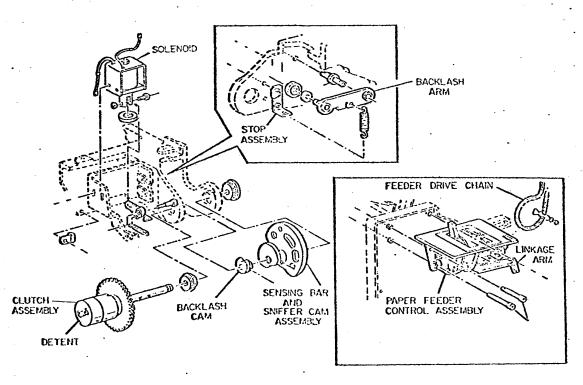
Paper Feeder Clutch Assembly and Cams
